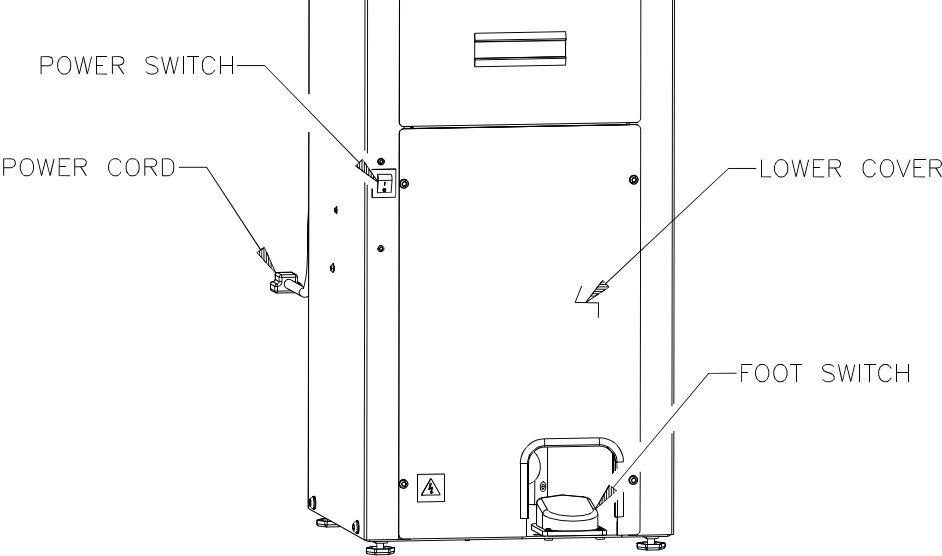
Remove Lower Cover to Access Circuit Breaker
